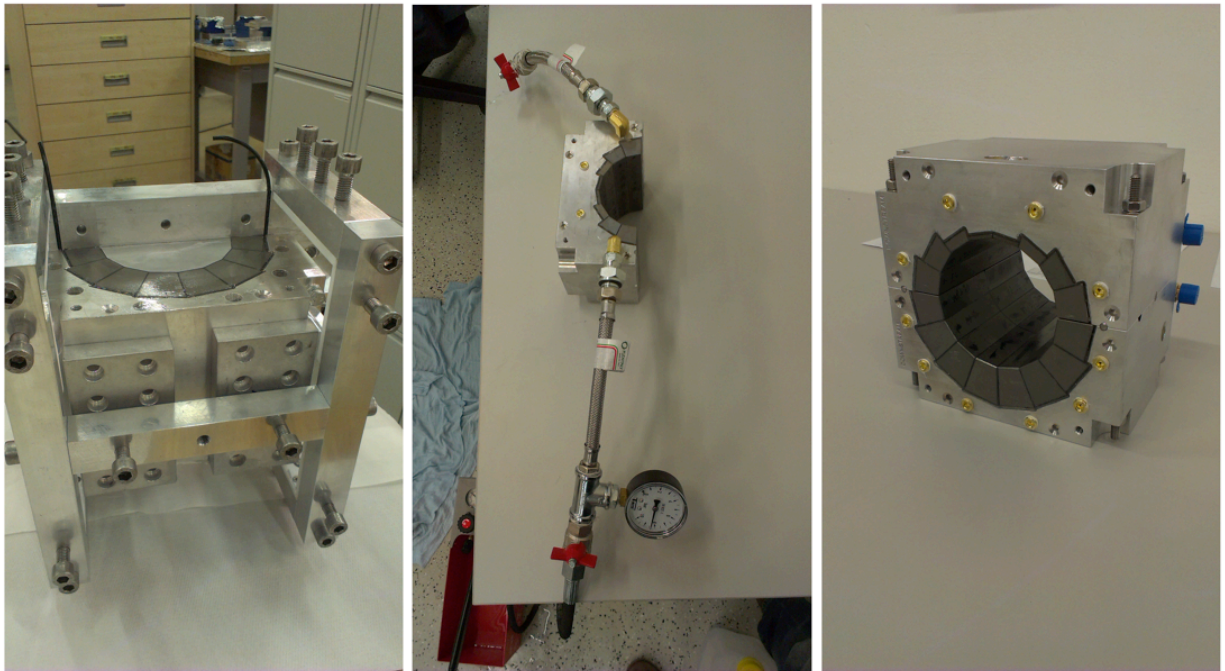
One of the KYMA magnet assembly rigs, water-cooling pressure testing, and a completed magnet.
